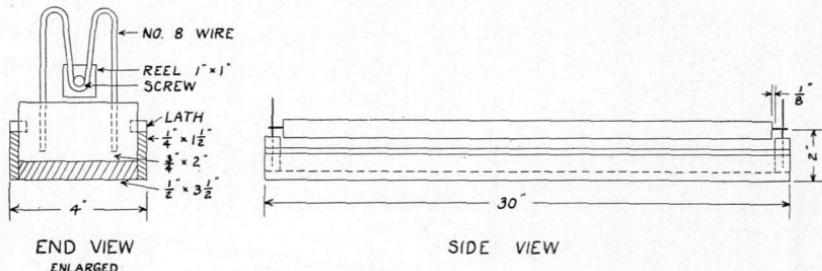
Plans for the construction of a reel-type chick feeder. A similar feeder, only larger, can be used for pullets or layers.
